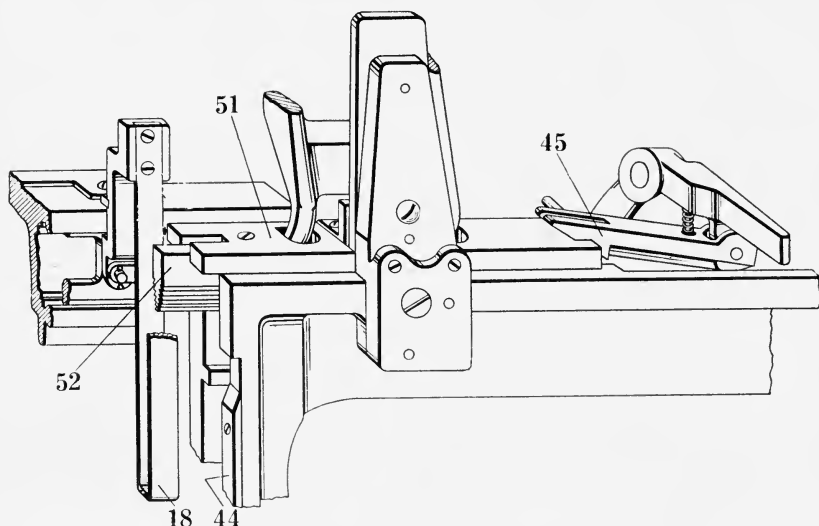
The First Stroke of the Transfer Slide Finger, 18, is regulated by a screw in the automatic safety pawl in the rim of the elevator transfer cam, Fig. 164. This screw should be set so that when the elevator transfer lever cam roller causes the plunger in the cam to move the automatic safety pawl clear of the upper stopping lever, the right side of the finger 18 will be flush with the left end of the second elevator bar plate 51. When this adjustment has been properly made, the finger 18 will push all the matrices onto the second elevator bar 52, clear of the first elevator jaws.
